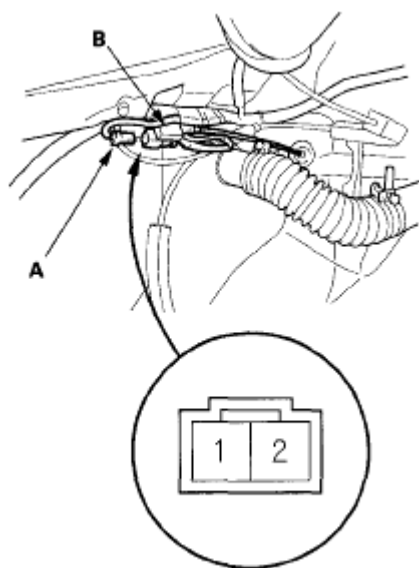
Identifying 2P Connector And Fuel Fill Door Switch
